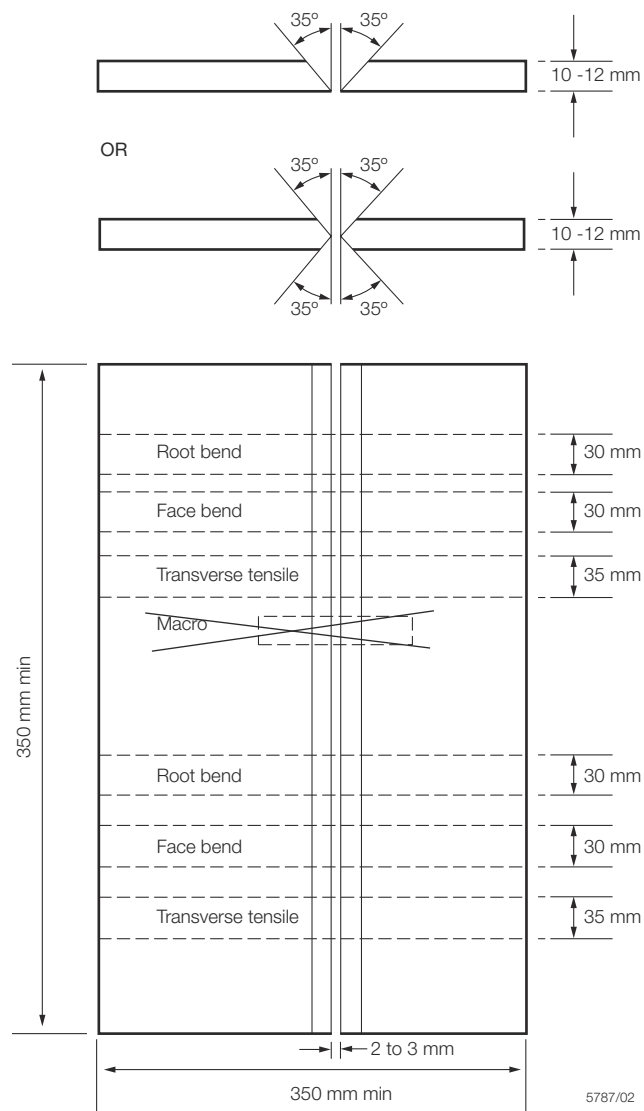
Butt weld test assembly (positional, multi-run technique)
